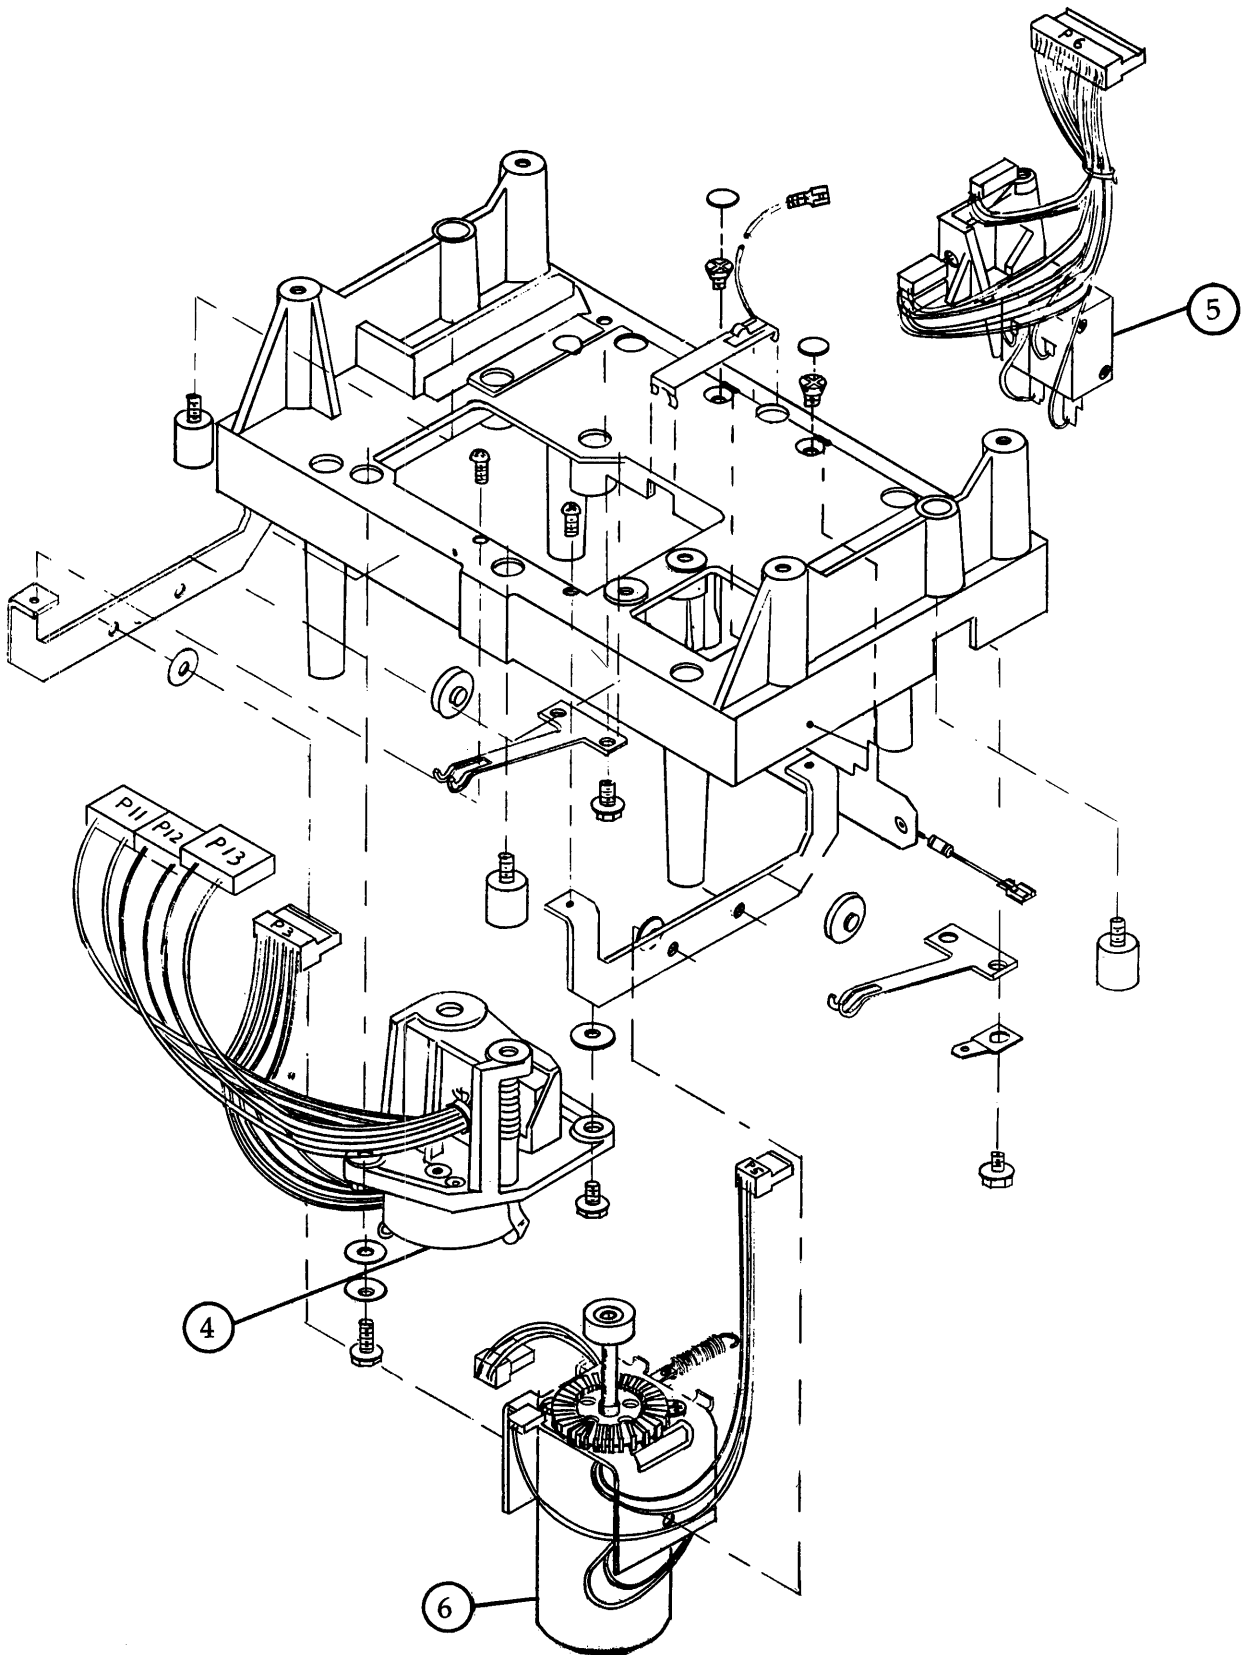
LSI Sidewinder Parts Location (Sheet 2 of 2)
